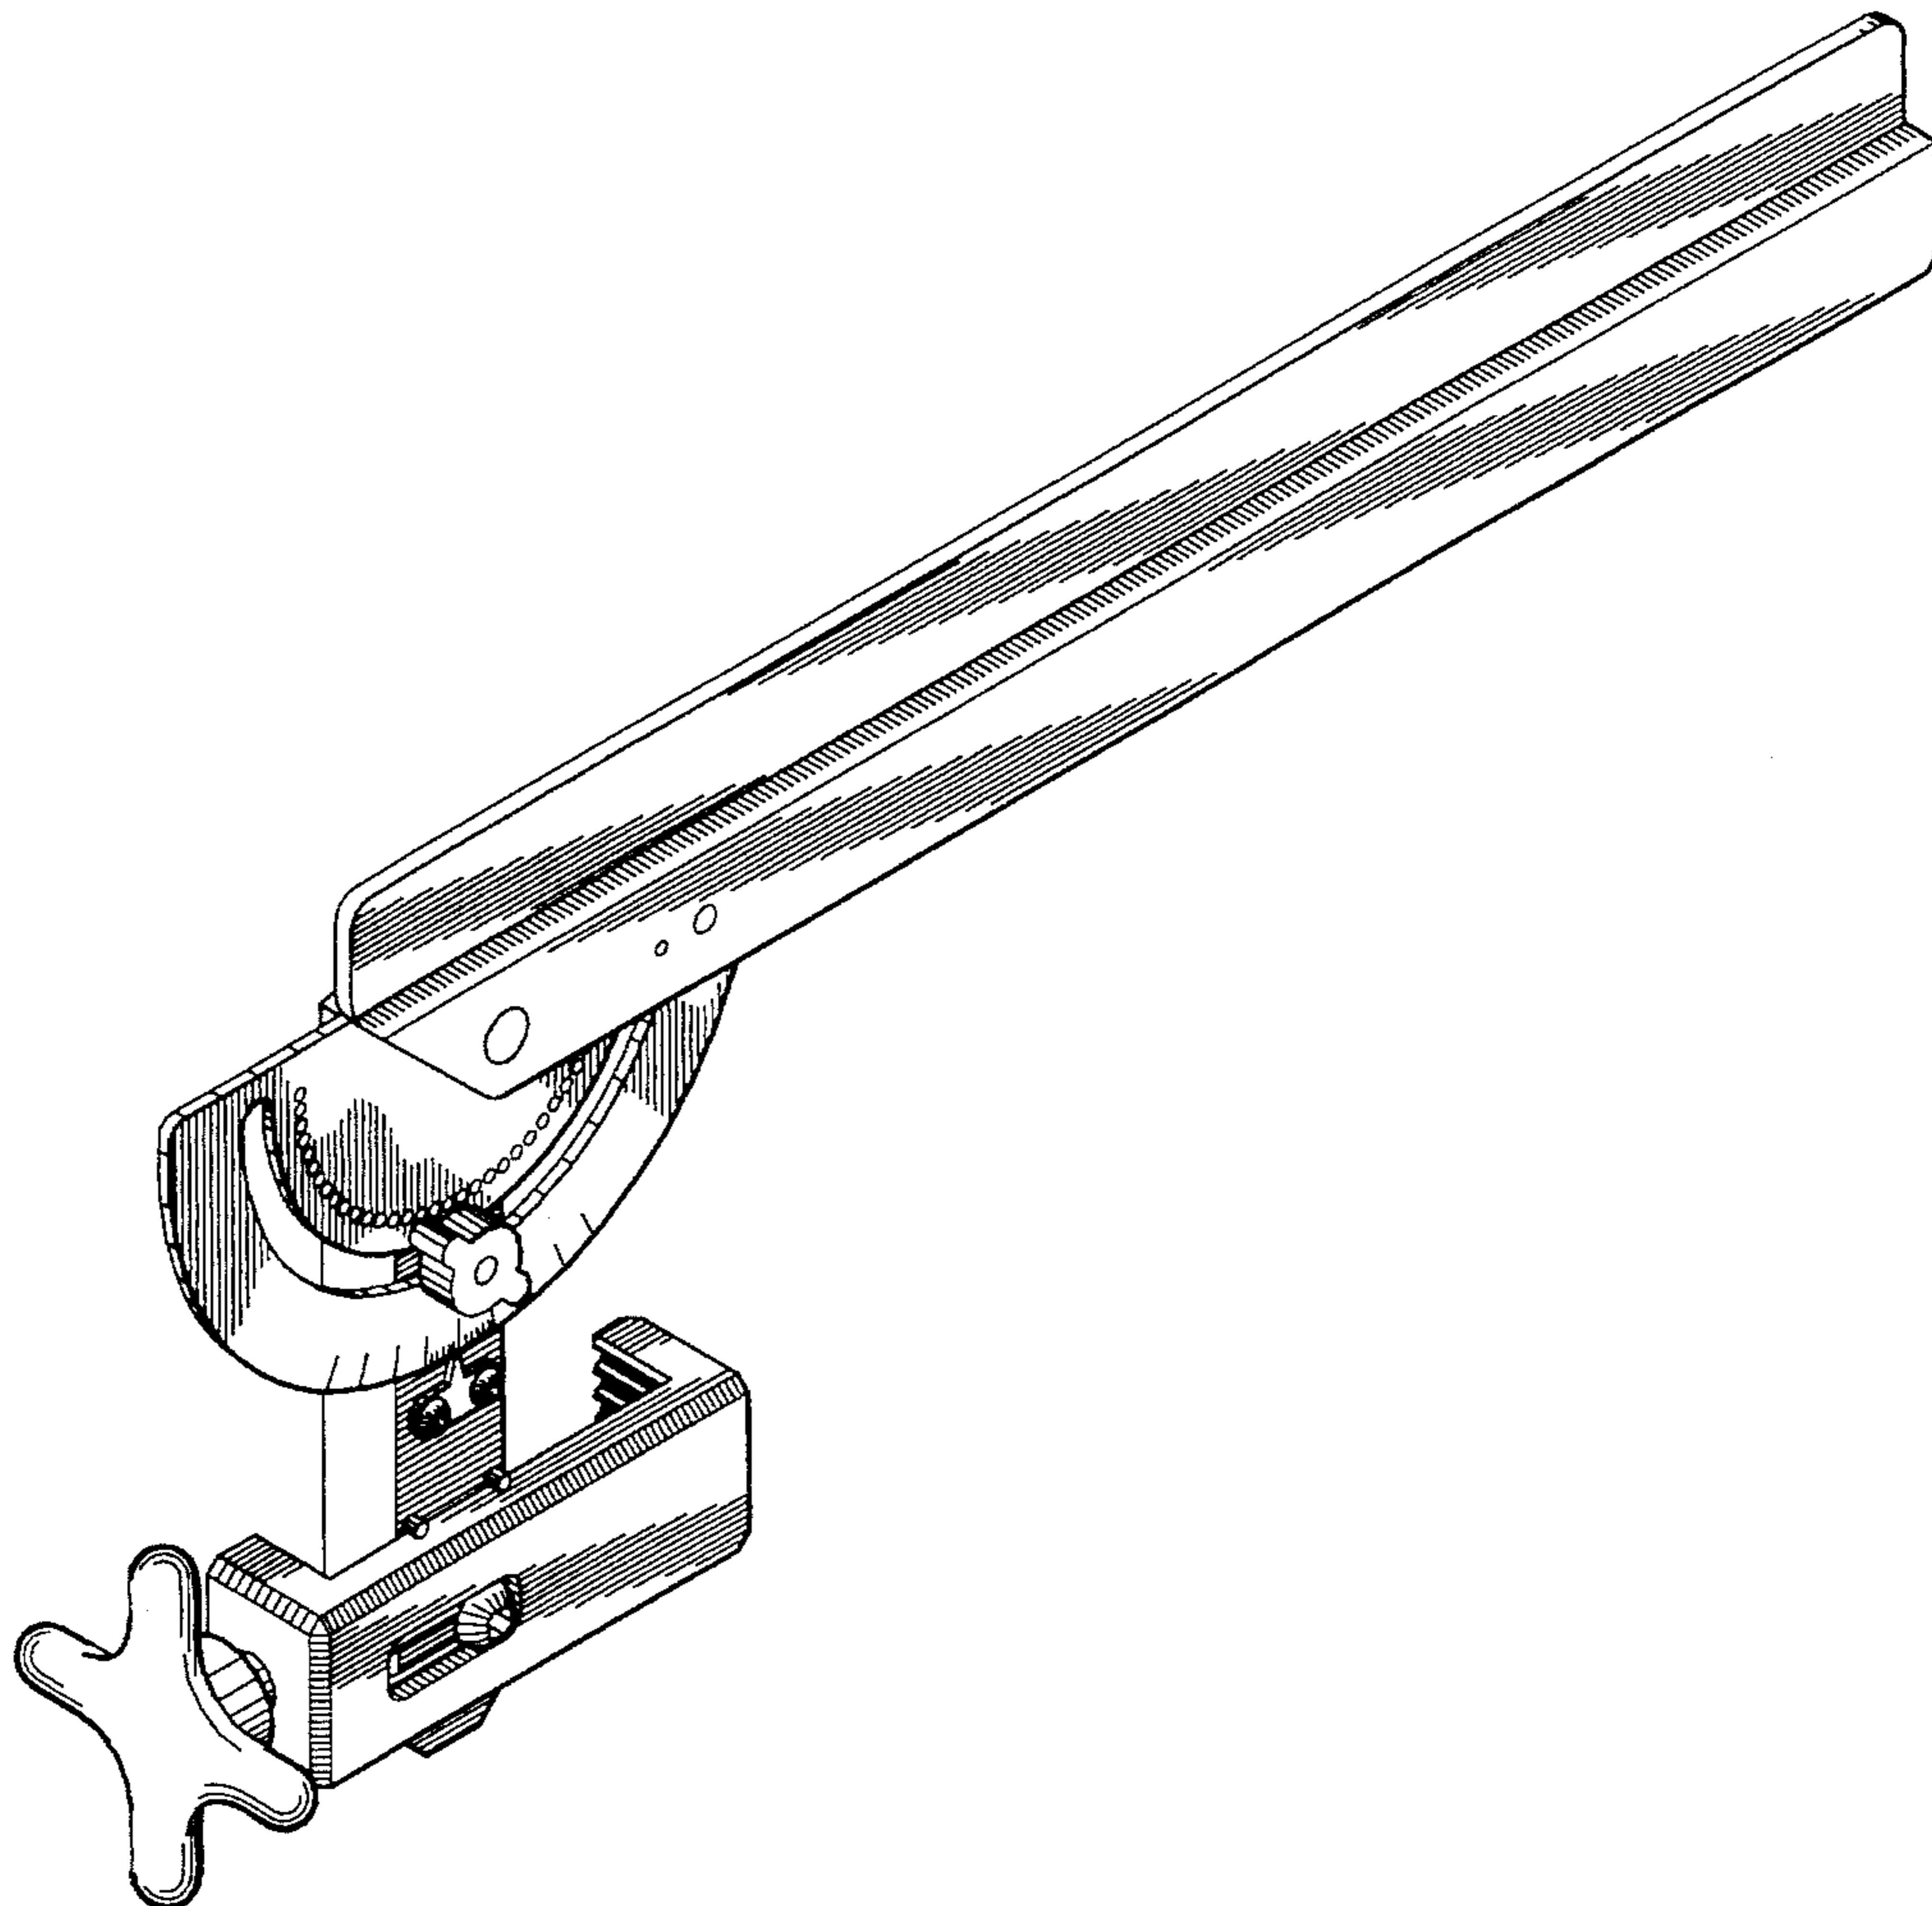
is a perspective view of a cutting guide protractor showing my new design;
